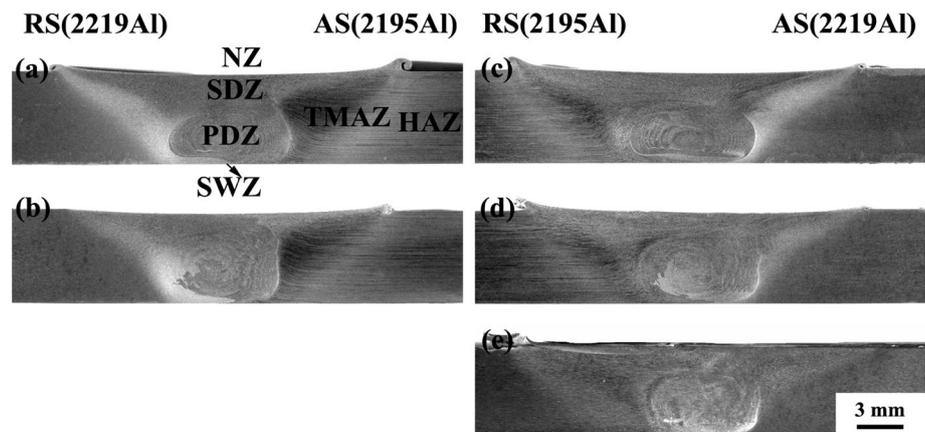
Cross-sectional macrostructure of FSW 2219Al-T8/2195Al-T8 joints: a 2219RS-800-200, b 2219RS-800-400, c 2219AS-800-200, d 2219AS-800-400, and e 2219AS-1200-800.
